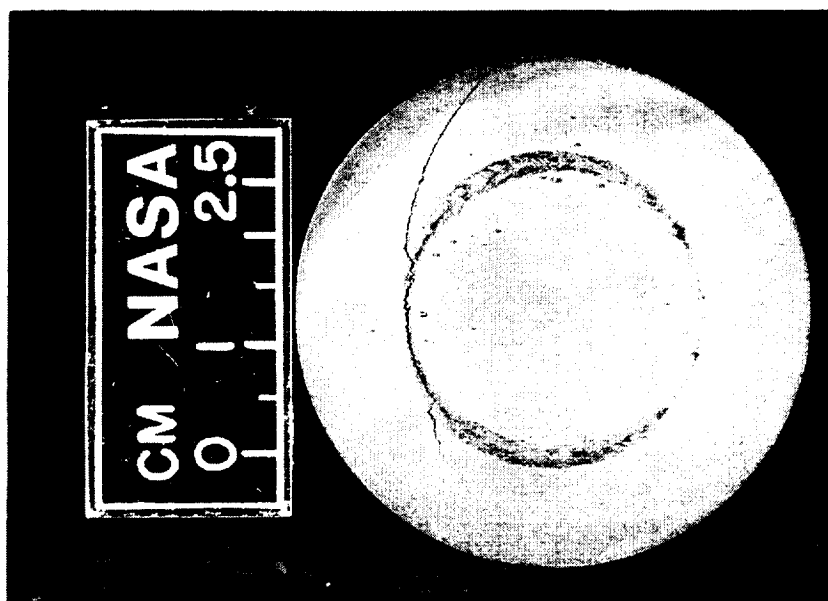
Strain-age Cracking in 4.7 cm Diameter Specimen.
